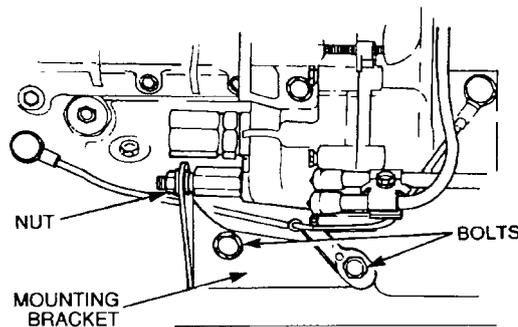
Installing the Injection Pump Rear Mounting Bracket
